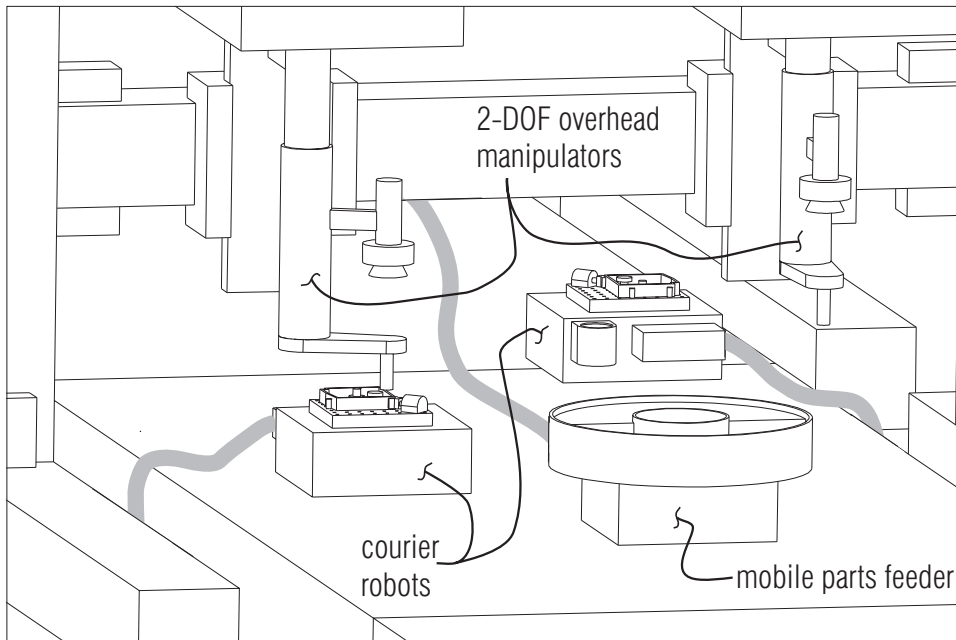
A miniature mobile parts feeder in a minifactory setting: a single feeder supplies parts to multiple low-DOF overhead manipulators.
